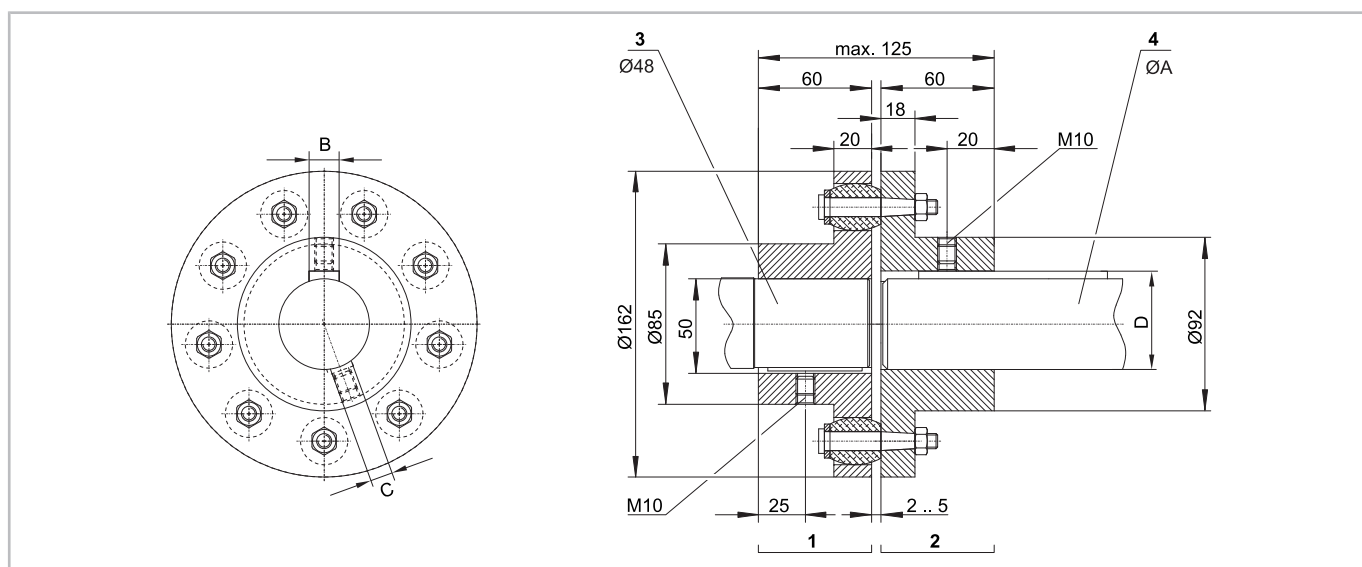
Dimensional drawing of coupling KS720 incl. KS720EX
